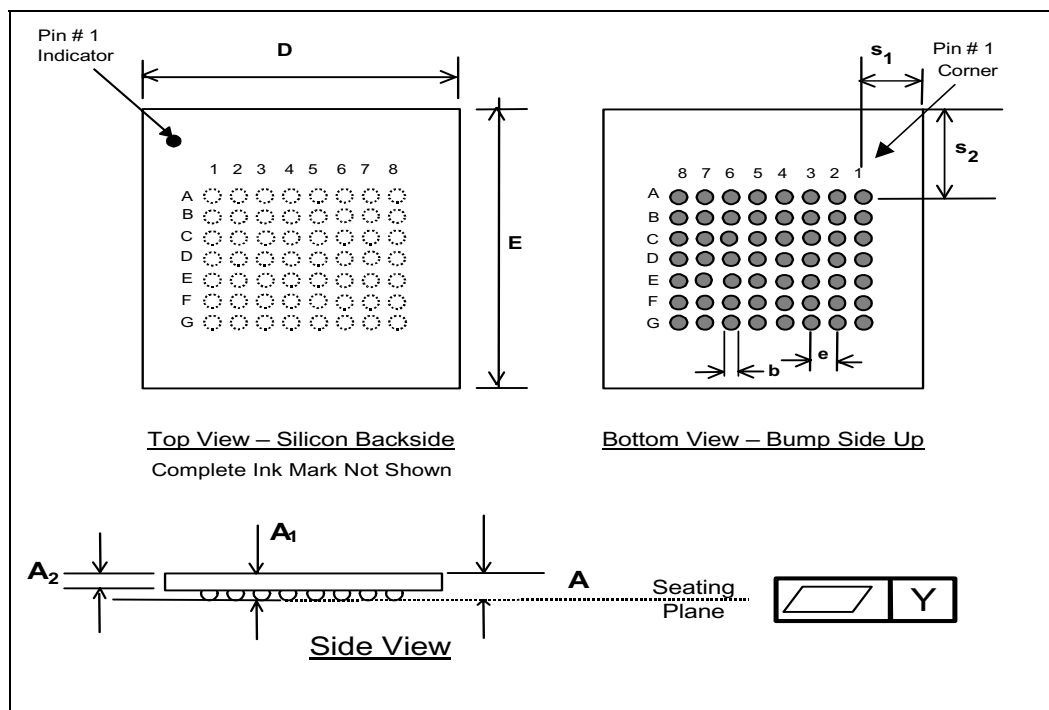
128-Mbit VF BGA, 0.75 mm Ball Pitch, 7×8 Ball Matrix Package Drawing
